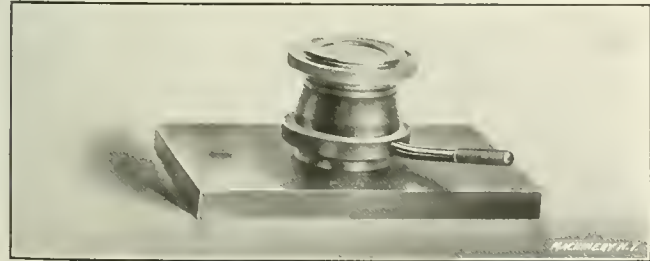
Chuck for Holding Graduated Disk for Engraving
